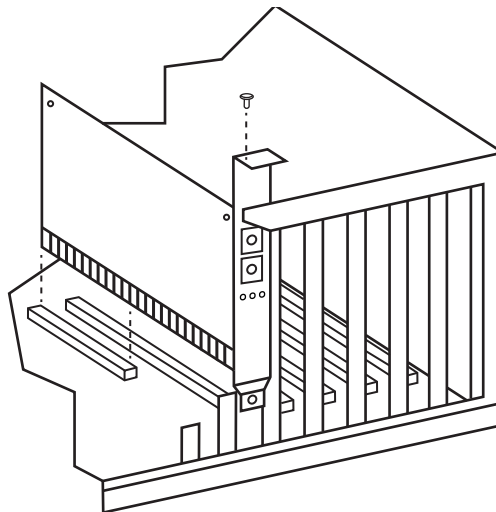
INSTALLING THE CARD IN A PCIe SLOT
